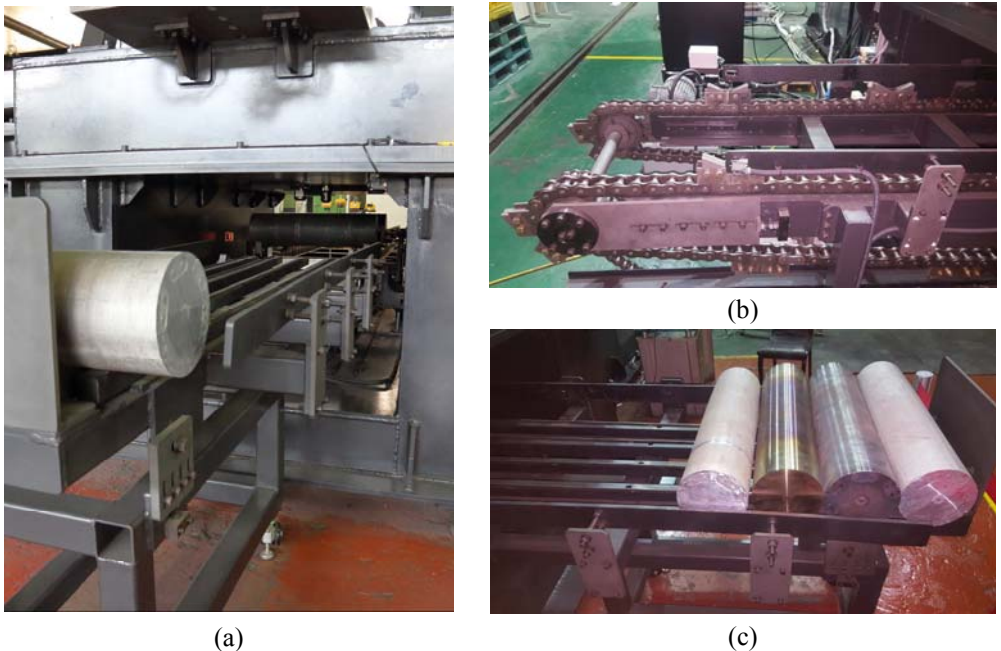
(a) A view of the automatic loading and unloading unit for the metal billet; (b) a loading position of the metal billet with a conveyor system; (c) an unloading position of the metal billets
